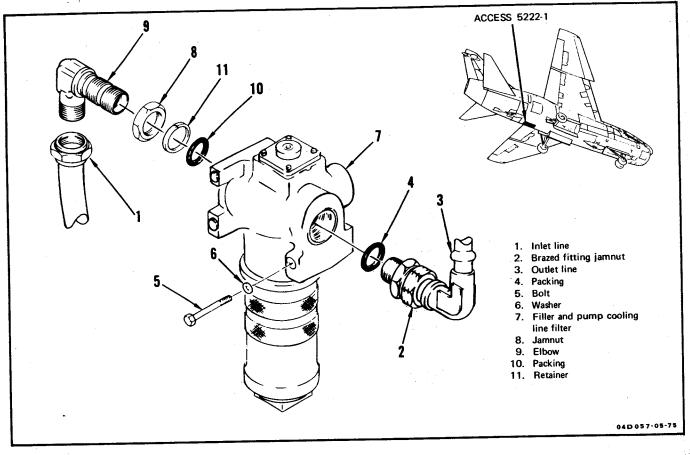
Filler and Pump Cooling Line Filter Removal and Installation
